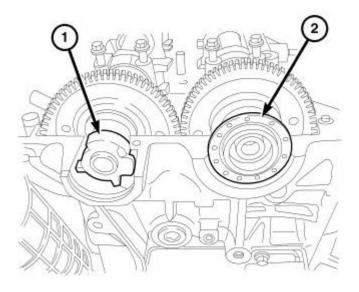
CAMSHAFT OIL SEAL Courtesy of CHRYSLER LLC
